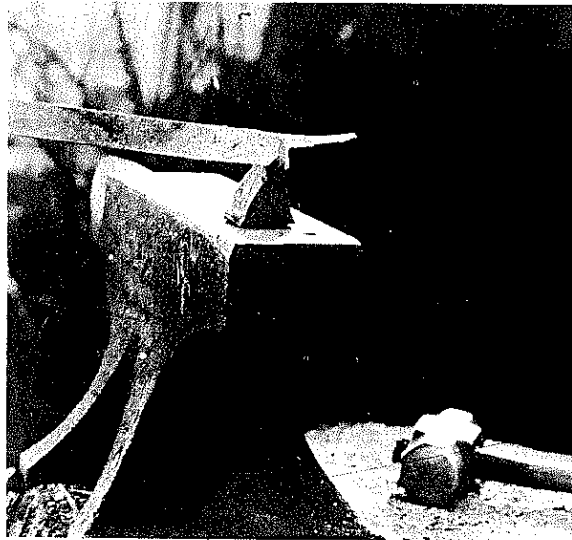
Wallace Gusler drawing out the tang. (Photo courtesy of Colonial Williamsburg.)
